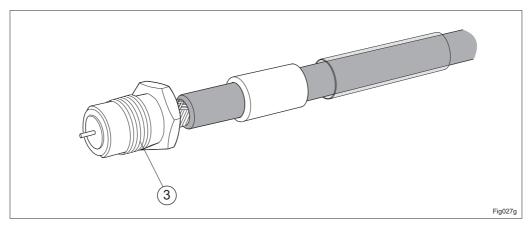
Inserting the trimmed cable into the rear end of the rear part connector.
